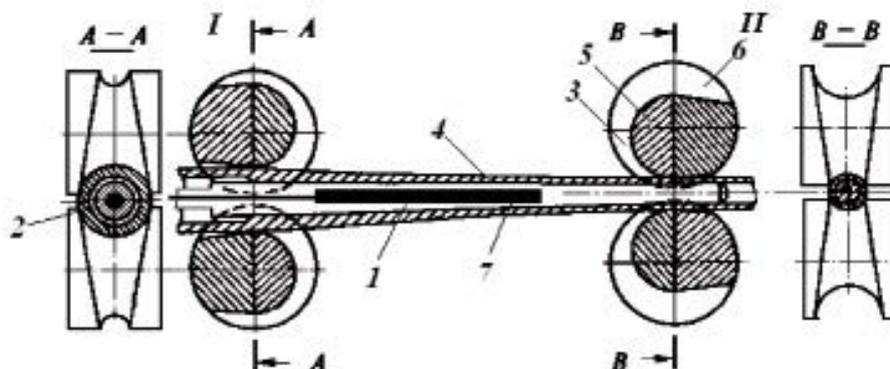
Scheme of the cold pilger pipe rolling (I - front and II - back working stand position): 1 - conical mandrel; 2 - annular space; 3 - die type; 4 - rolled pipes; 5 - gauge; 6 - working rolls; 7 - high-speed vibrator
